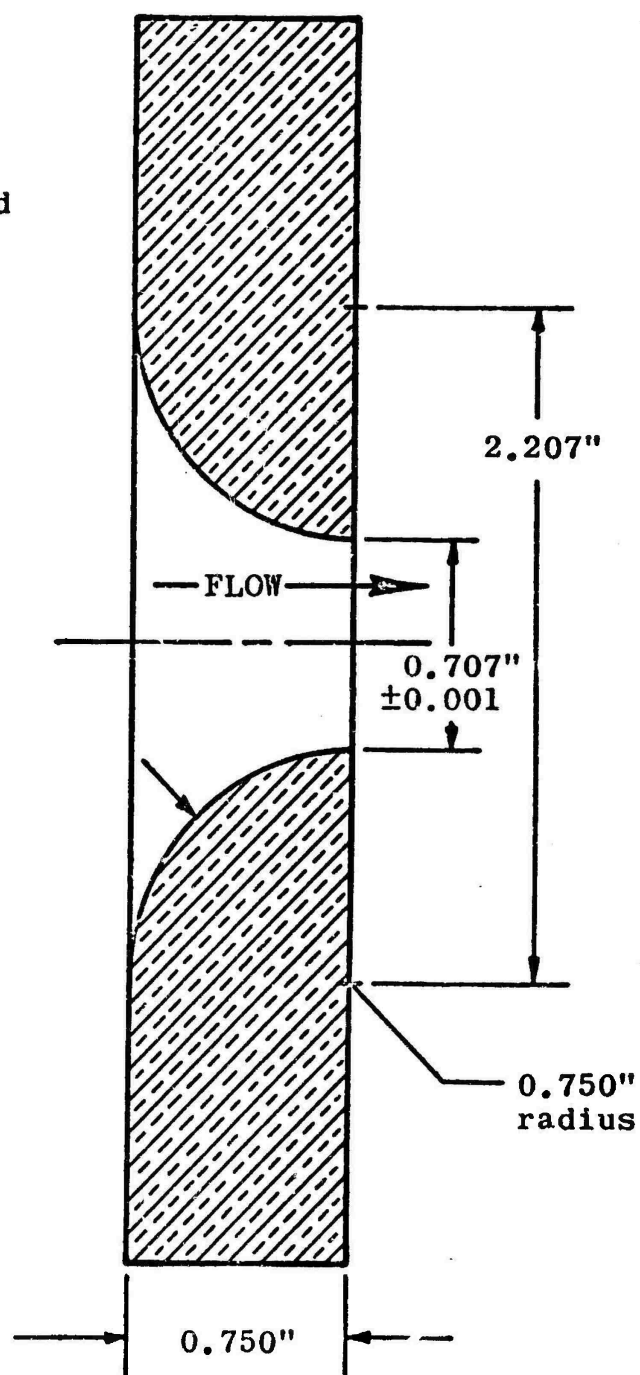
0.707 INCH DIAMETER SMOOTH APPROACH NOZZLE.
